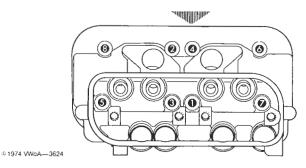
Dual-carburetor and fuel injection engine tightening sequence.
